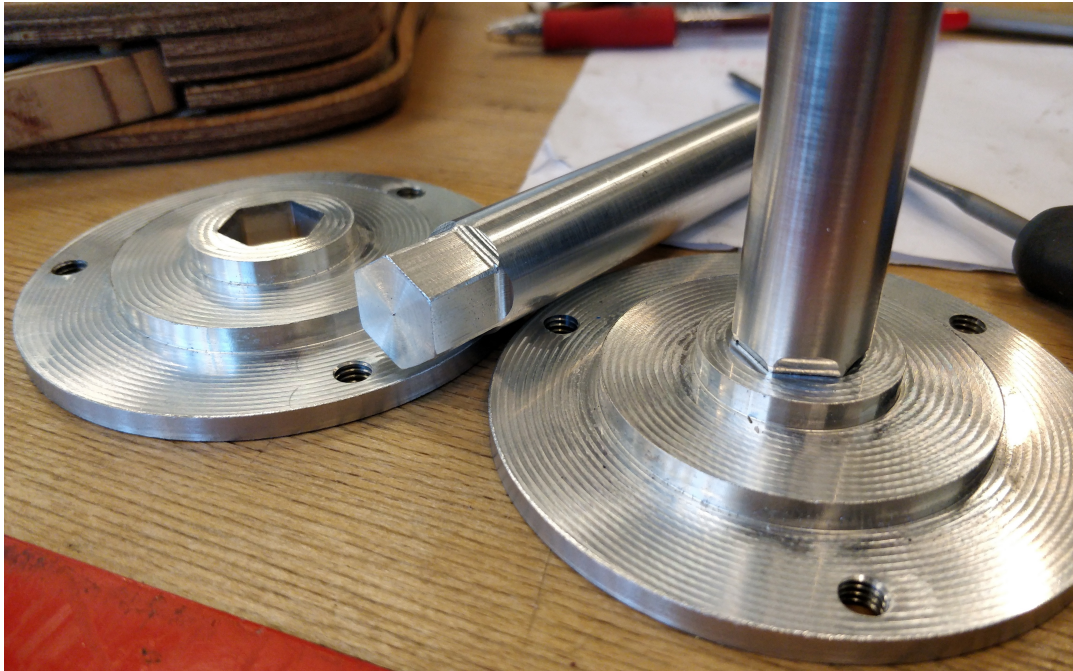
Test fitting of the axle and brake disc mount hex connection.
